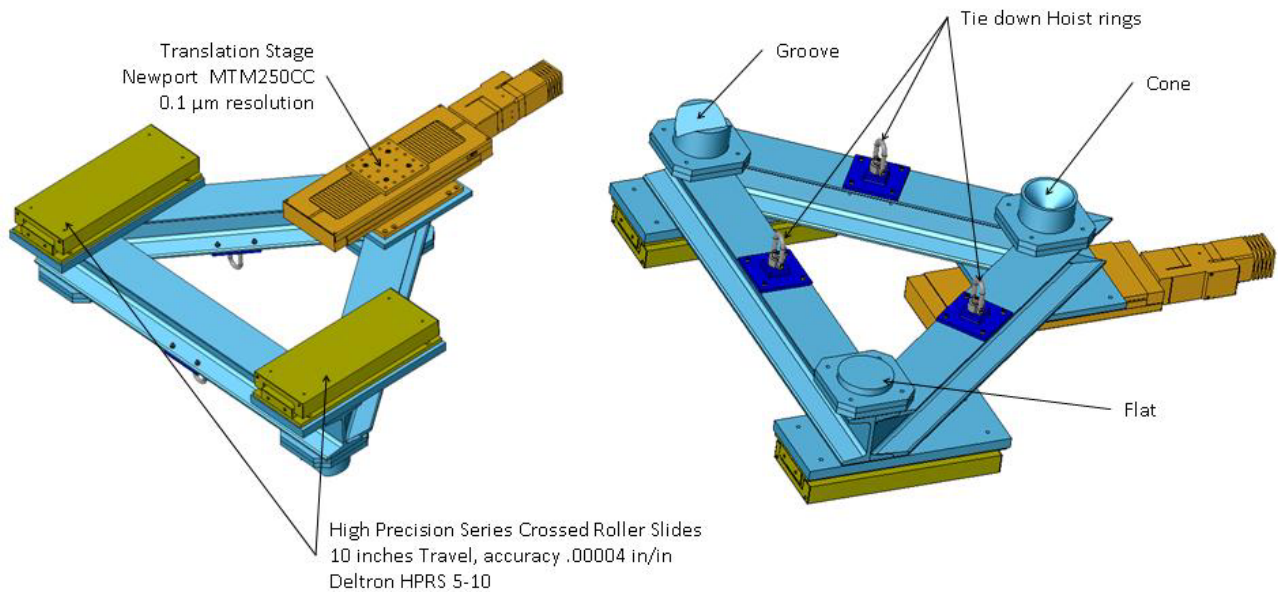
LGS WFS assembly translation mechanism (top view at left) and kinematic mounting mechanism to the support legs (bottom view at right)
